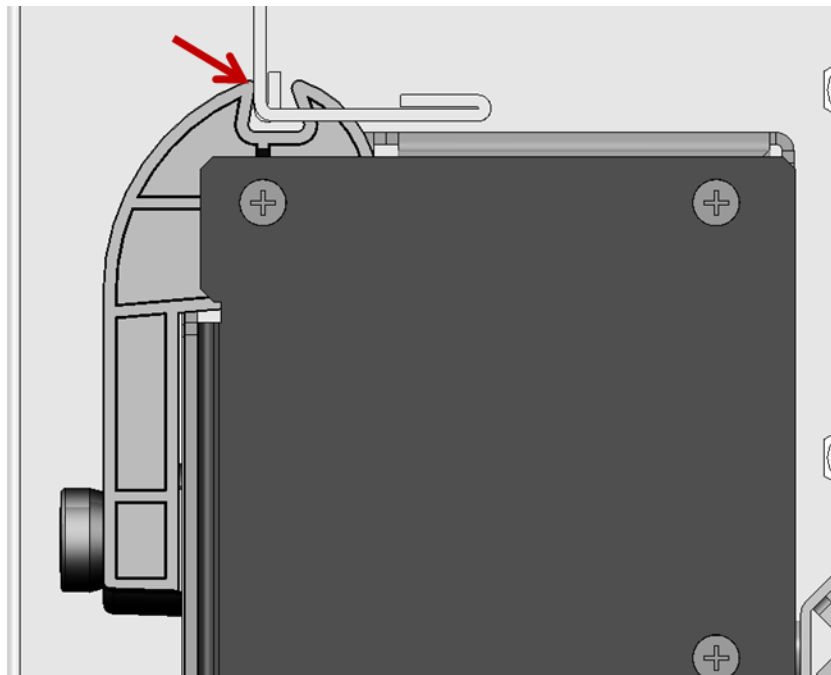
Screwed Down Latch and Pushed Home Connection
